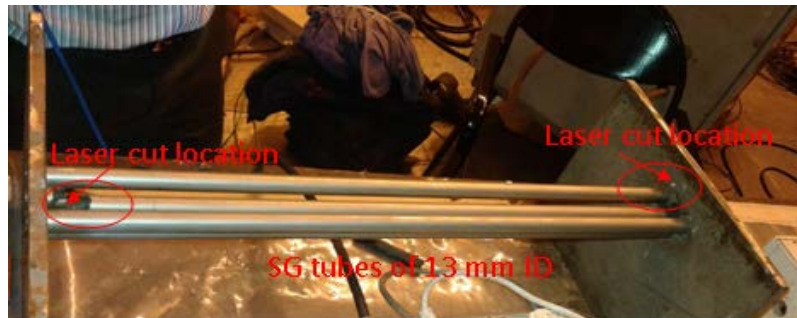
A view of laser cut location of steam generator tube during mock-up trials at KKNPP-2.
